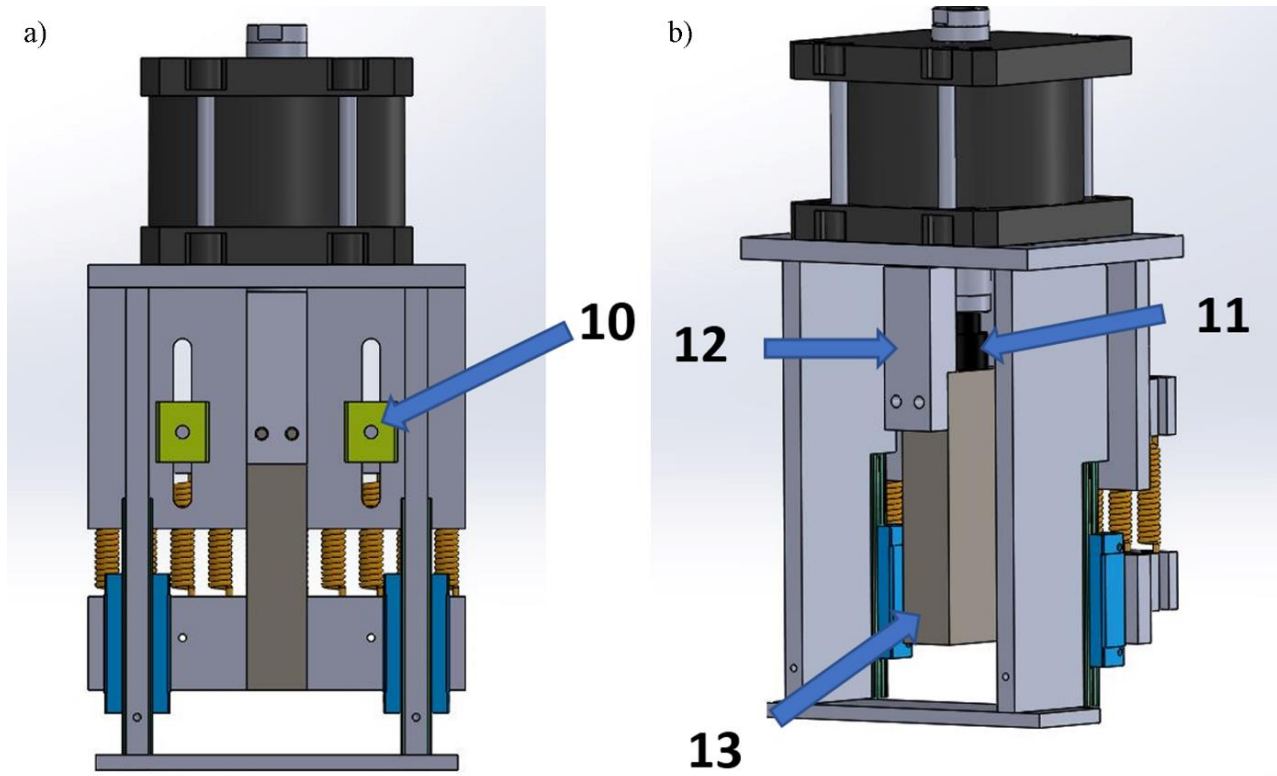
Design of fatigue machine from a) back side and b) a detail view (Yorulma makinesinin a) arka tarafından tasarımı ve b) detay görünümü)
